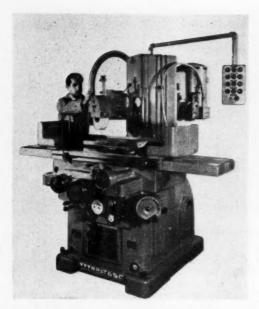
Zocca type RPAT hydraulic surface grinder with peripheral wheel and vertical cup wheel spindle heads on an indexing column
